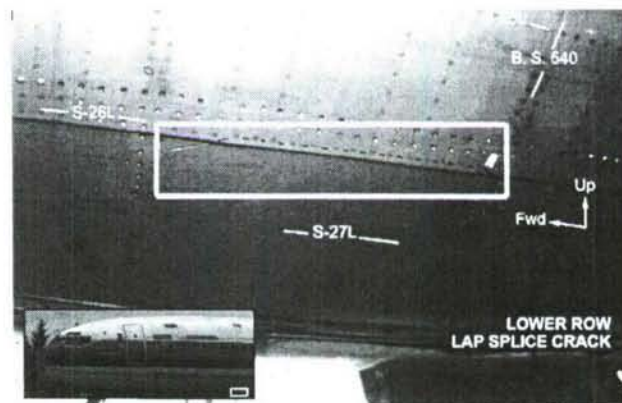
Twenty-Inch Lap Splice Crack Common to Lower Fastener Row
